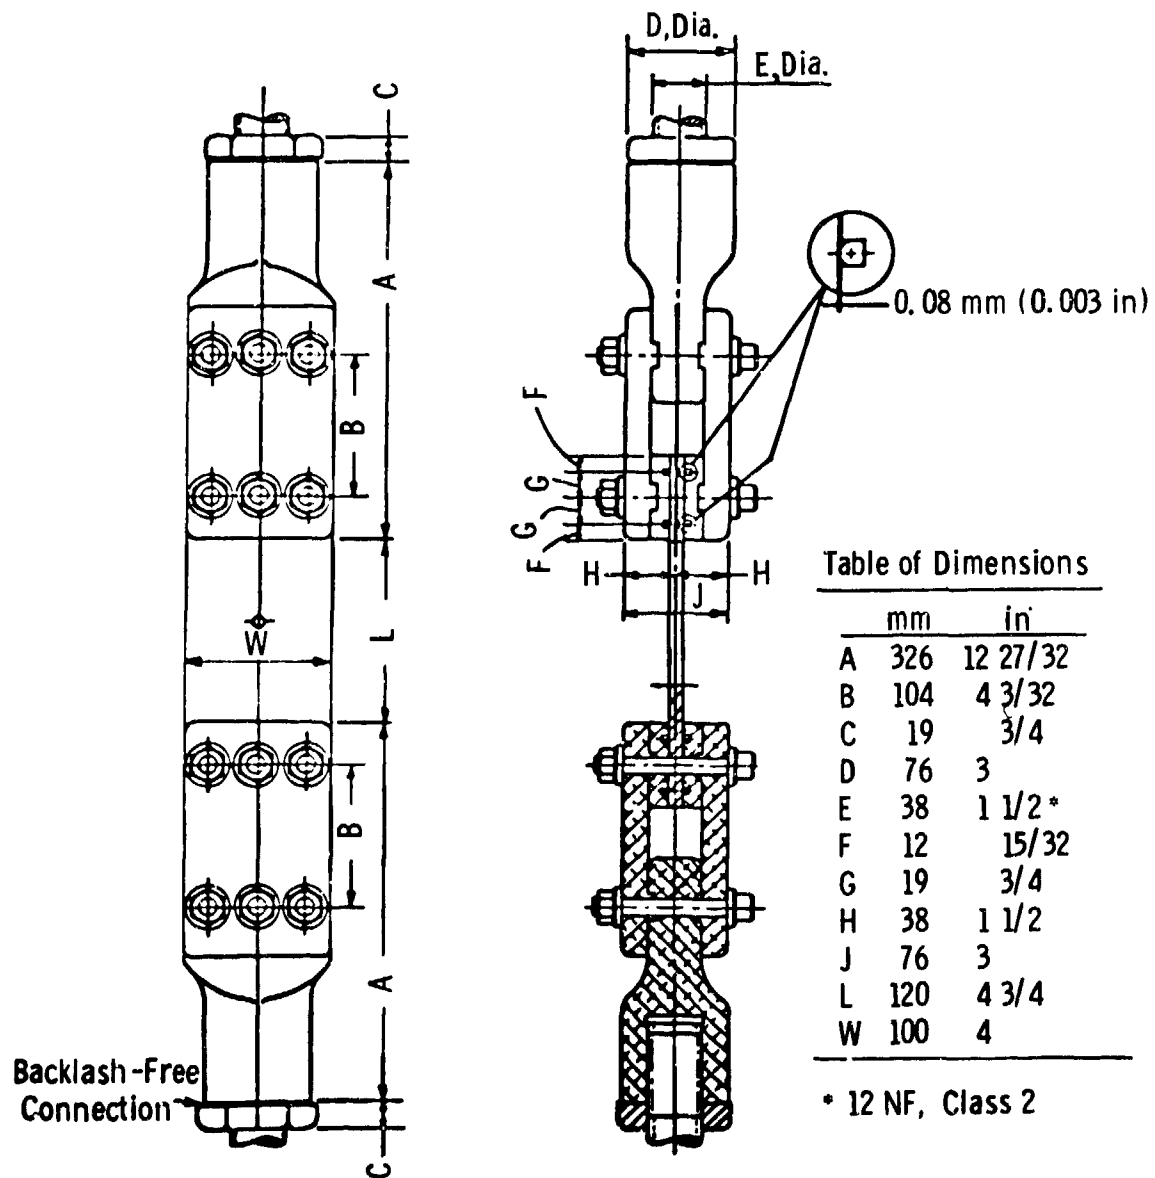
Example of bolt and keyway assembly for gripping 100 mm (4 in) - wide CCT specimen.
